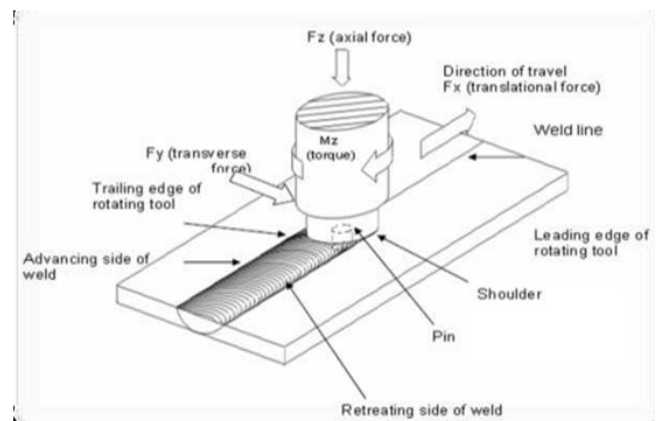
Schematic Diagram of the Friction Stir Welding Process
